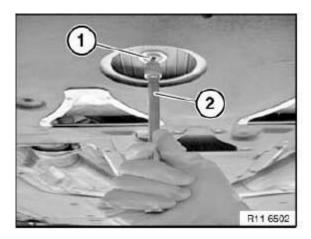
Identifying Screw Plug With Socket And Long Extension Courtesy of BMW OF NORTH AMERICA, INC.
